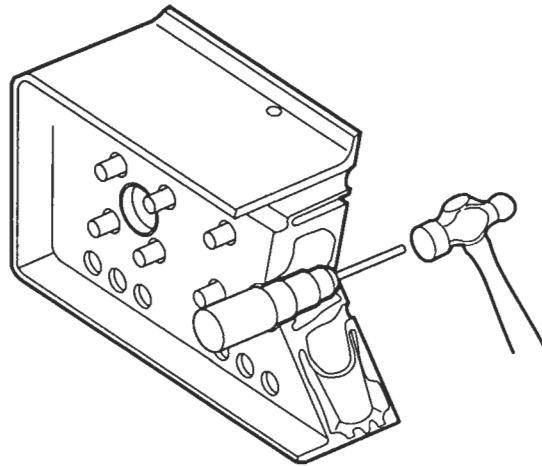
Removing Injector Tube with Tools J 5286-4C and J 5286-5
